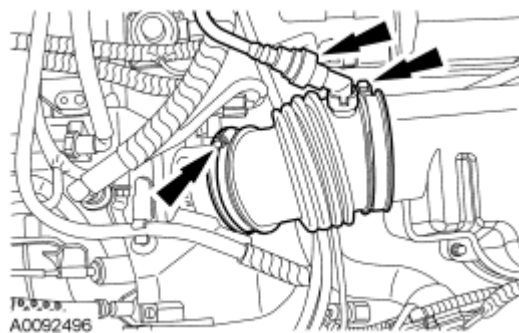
Locating Vent Tube, Outlet Pipe And Clamp
